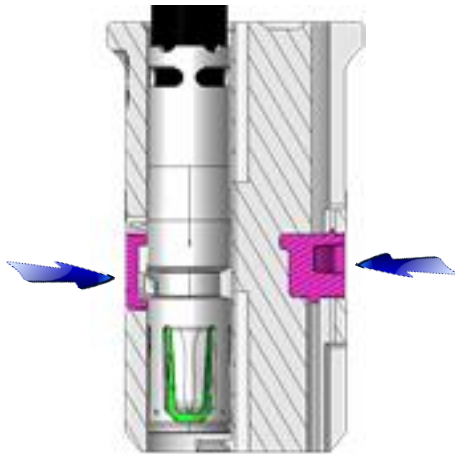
TPA IN BOTH SIDED ENDLOCK POSITION
